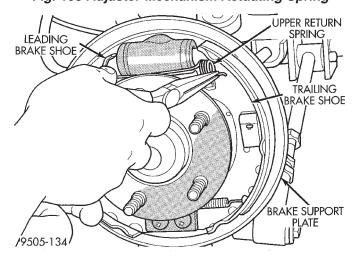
Upper Brake Shoe Return Spring brake shoe until the brake shoe and adjuster mechanism is removed from the support plate.
